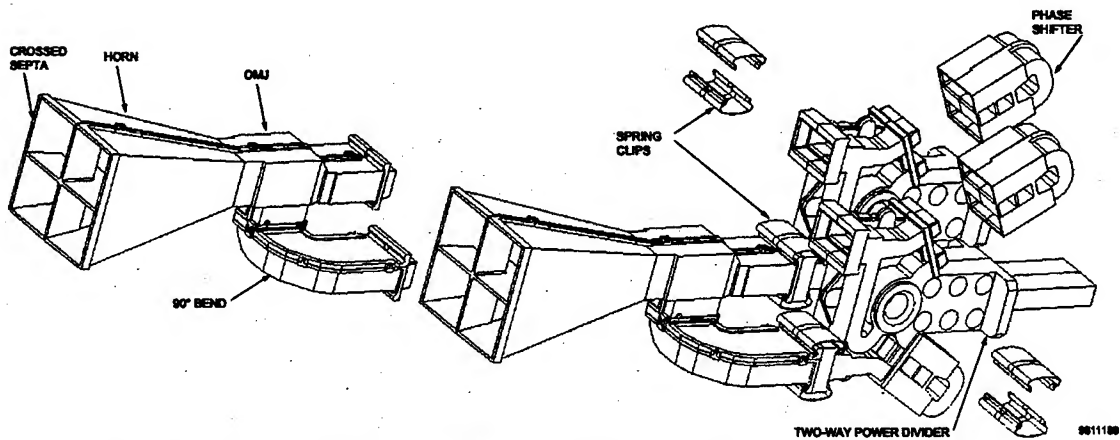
Horn/OMJ, Phase Shifters, and Two-Way Power Combiner Assembly
